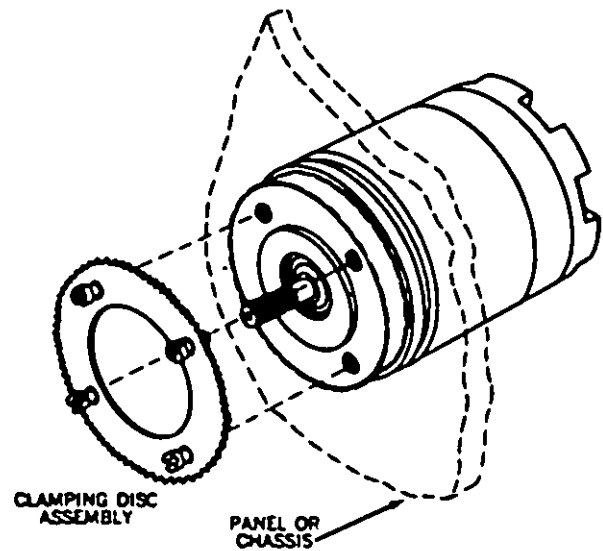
Mounting a synchro using a clamping disc assembly.
